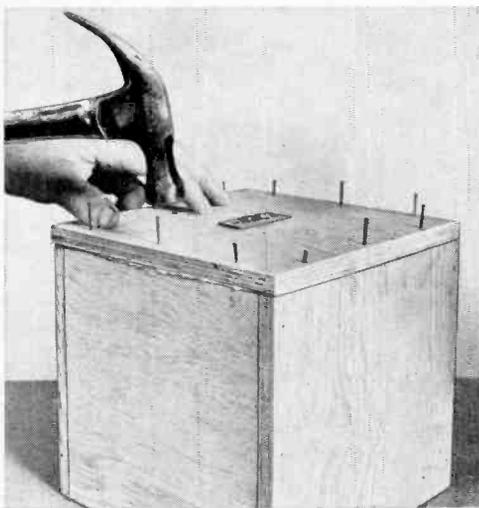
Mount screw-type terminal strip to rear of cabinet; then glue and nail rear wall to cabinet shell, trueing up sides, top, and bottom as you go.
